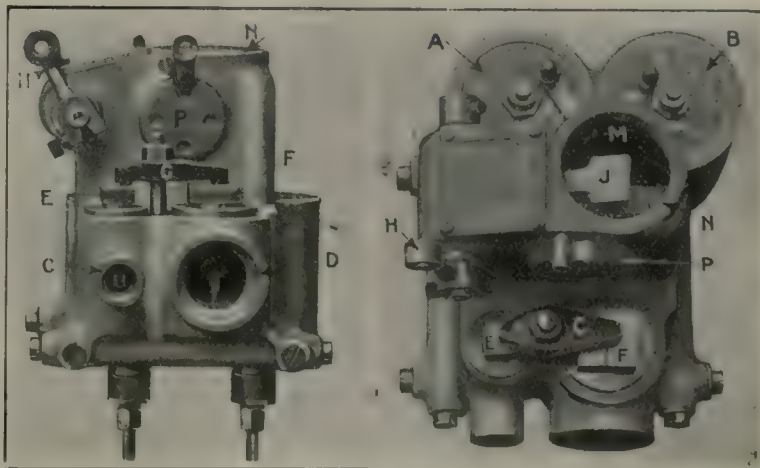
Sectional view of the throttle and mixing chambers of the Binks petrol-paraffin carburetter.
